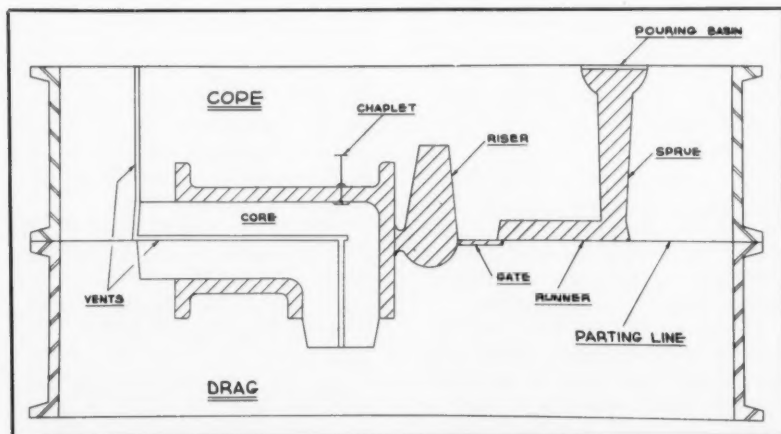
This ideal set-up in sand will produce minimum scrap.
